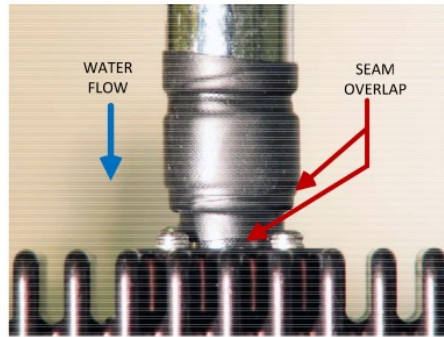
CLOSE-UP VIEW OF SEAM OVERLAP OF EPR TAPE
